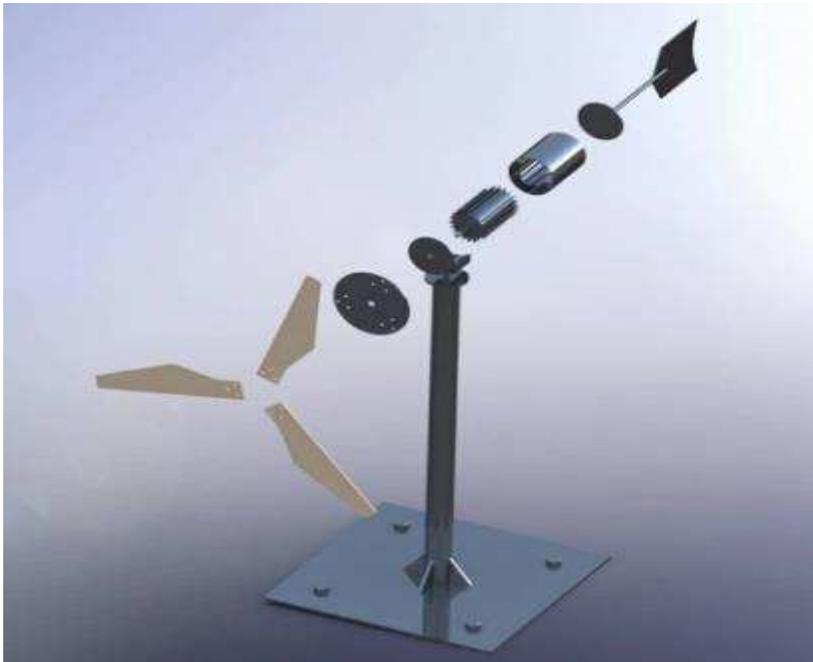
Exploded View of the of the Horizontal Wind Turbine.
